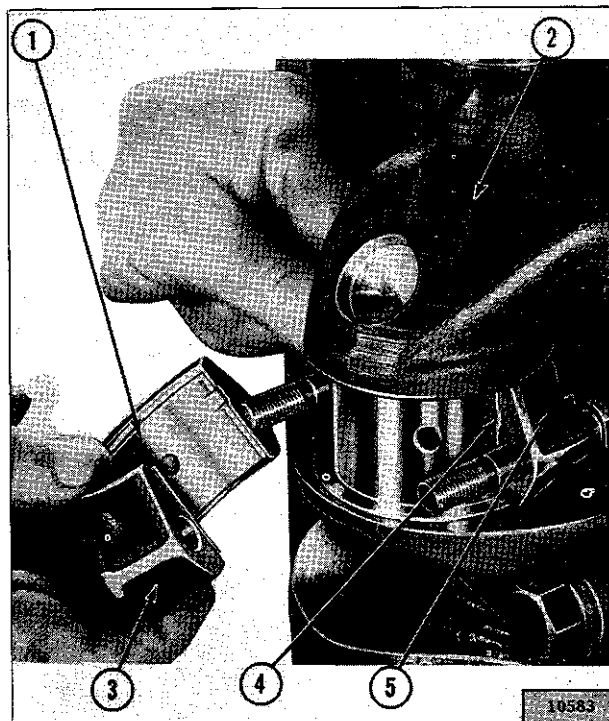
INSTALLING CONNECTING ROD BEARING CAP
